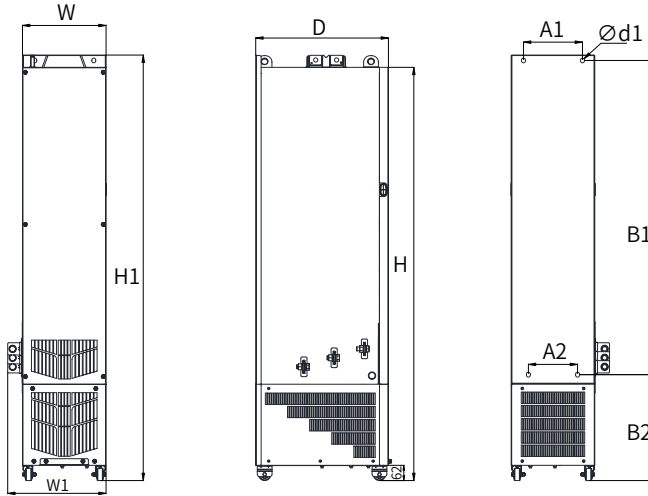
Overall and mounting dimensions of structures T10 to T12 (with reactor bases)
